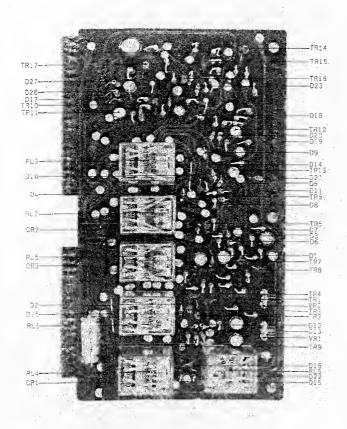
PHOTO OF SERVO P.C. BOARD (KH-1011)
